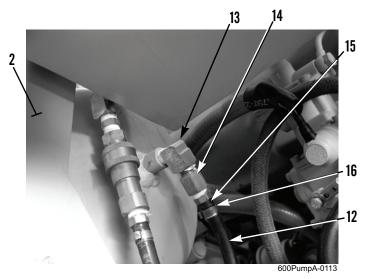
Pressure Gauge Hose and Inline Filter at Discharge Manifold.
